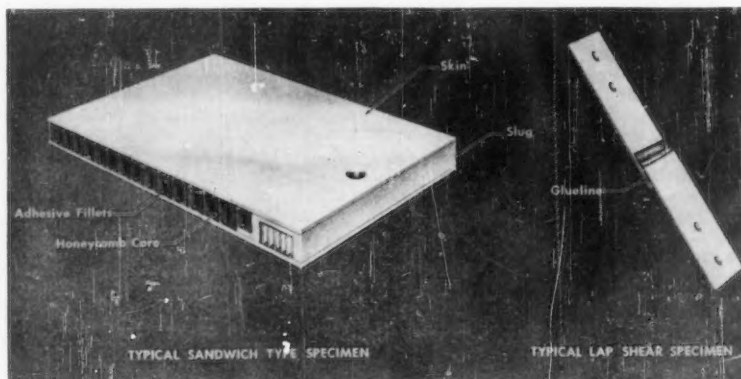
Sandwich and metal-to-metal bonded specimens.
